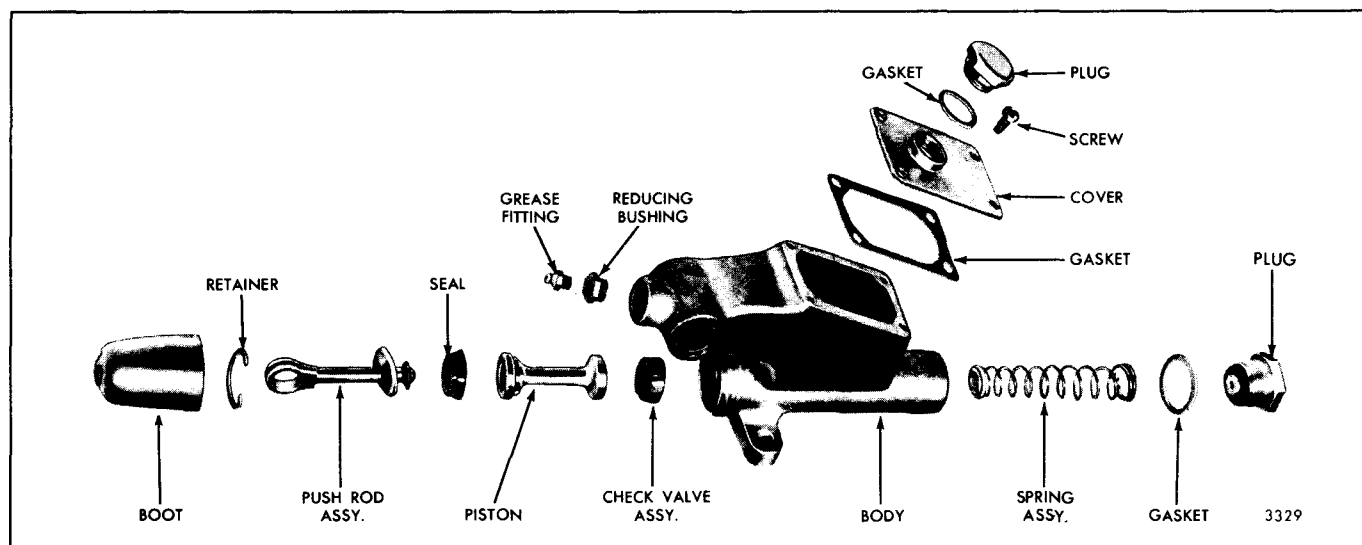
Hydraulic Starter Remote Control Master Cylinder Details and Relative Location of Parts
